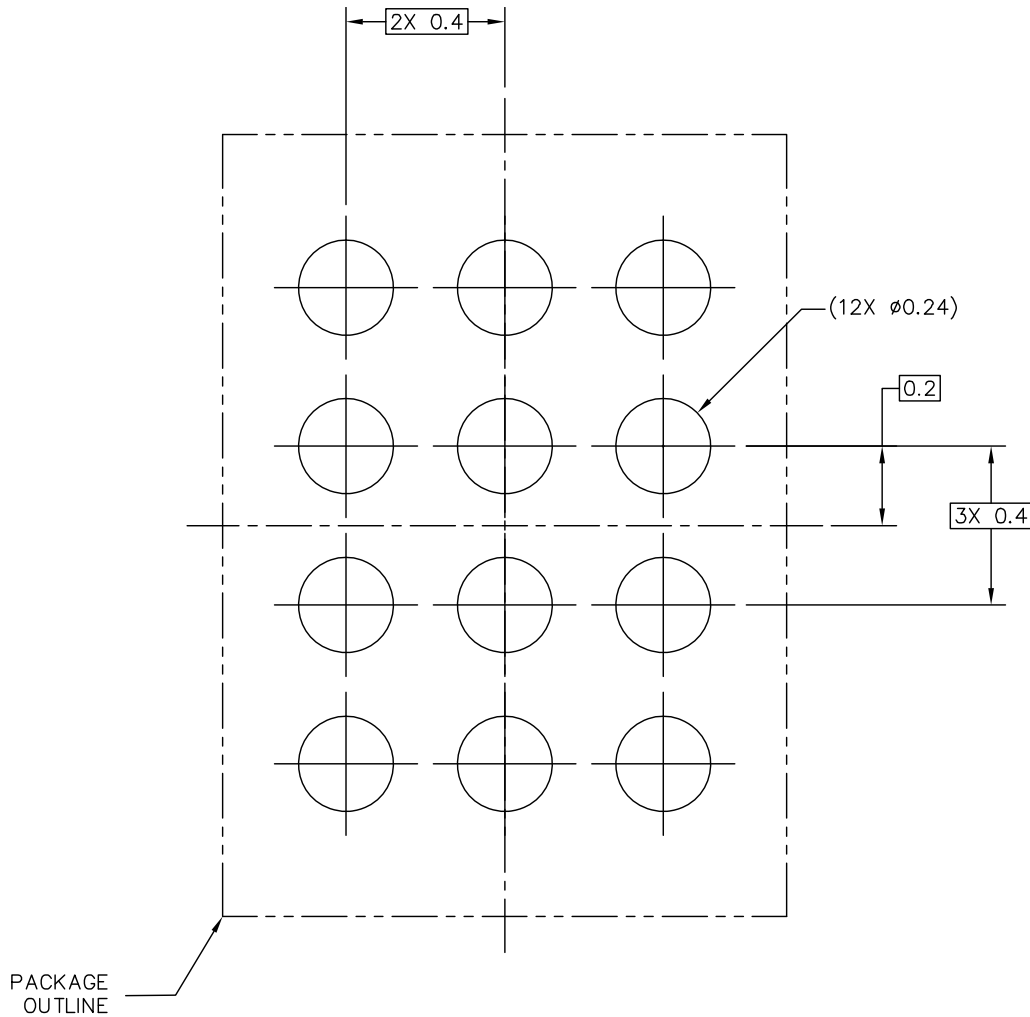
Soldering footprint for SOT1390-10 (WLCSP12) 1 of 3
